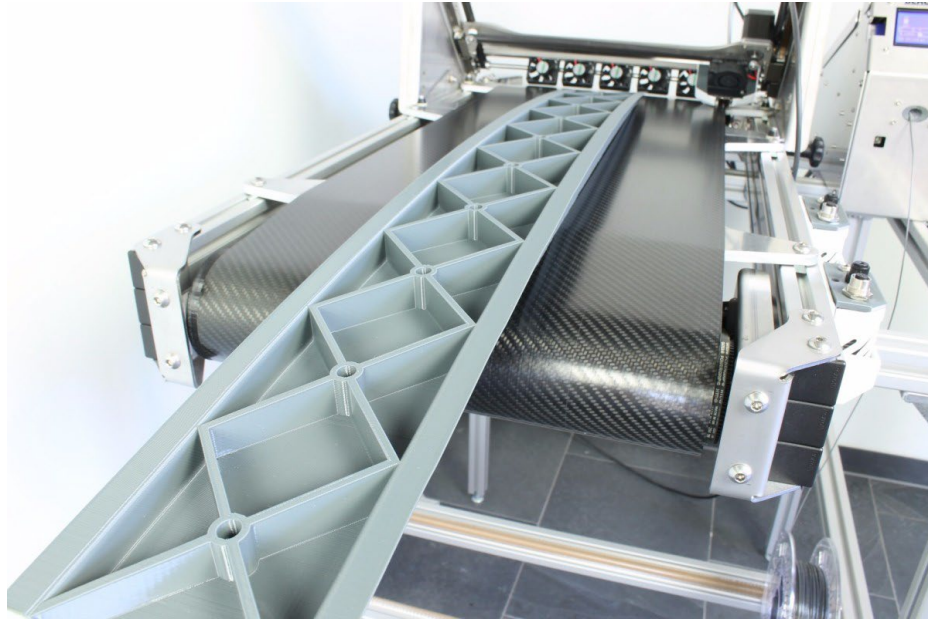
An example of a conveyor belt printer, the BlackBelt.
